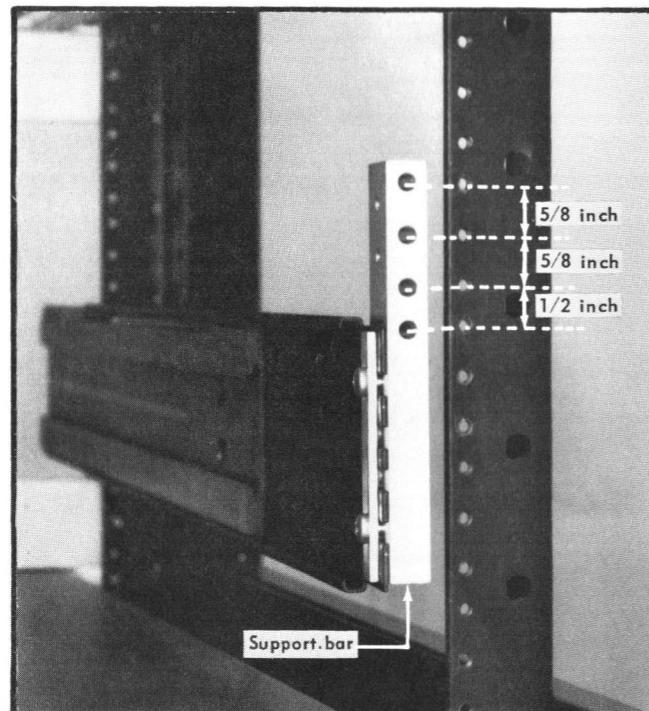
Vertical mounting position for rear end of slide-out tracks. Left stationary section is shown.
